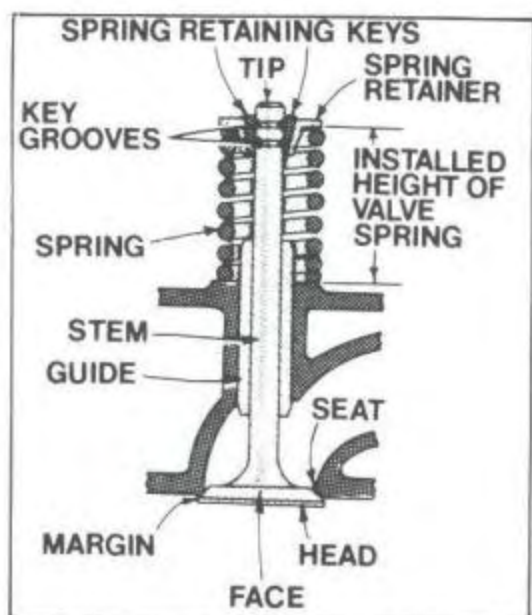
The different parts of the valve are shown in this cross section of a cylinder head
